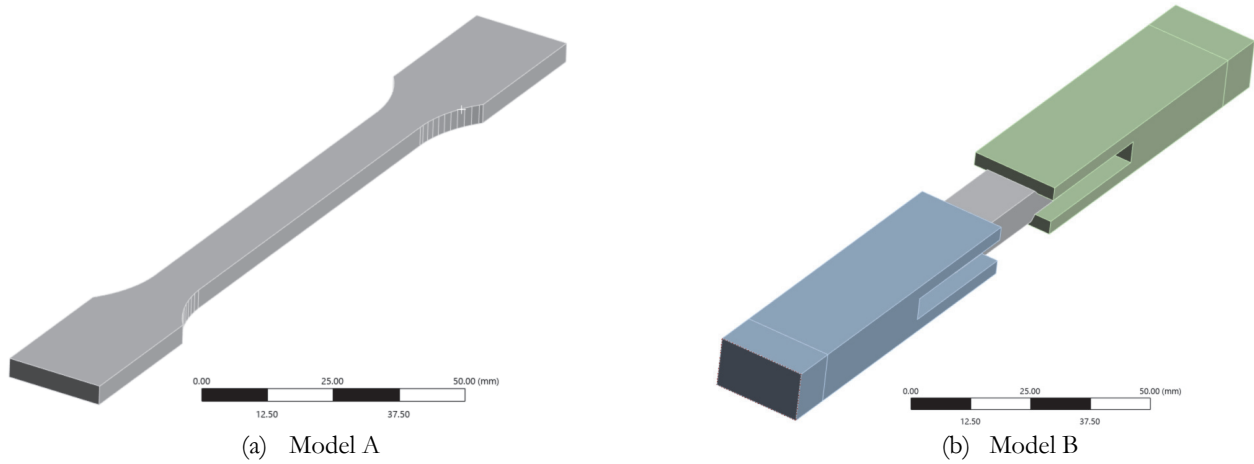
Printed 3D element (a) standard geometry of model A for tensile test, (b) special geometry of model B for shear tensile test.
